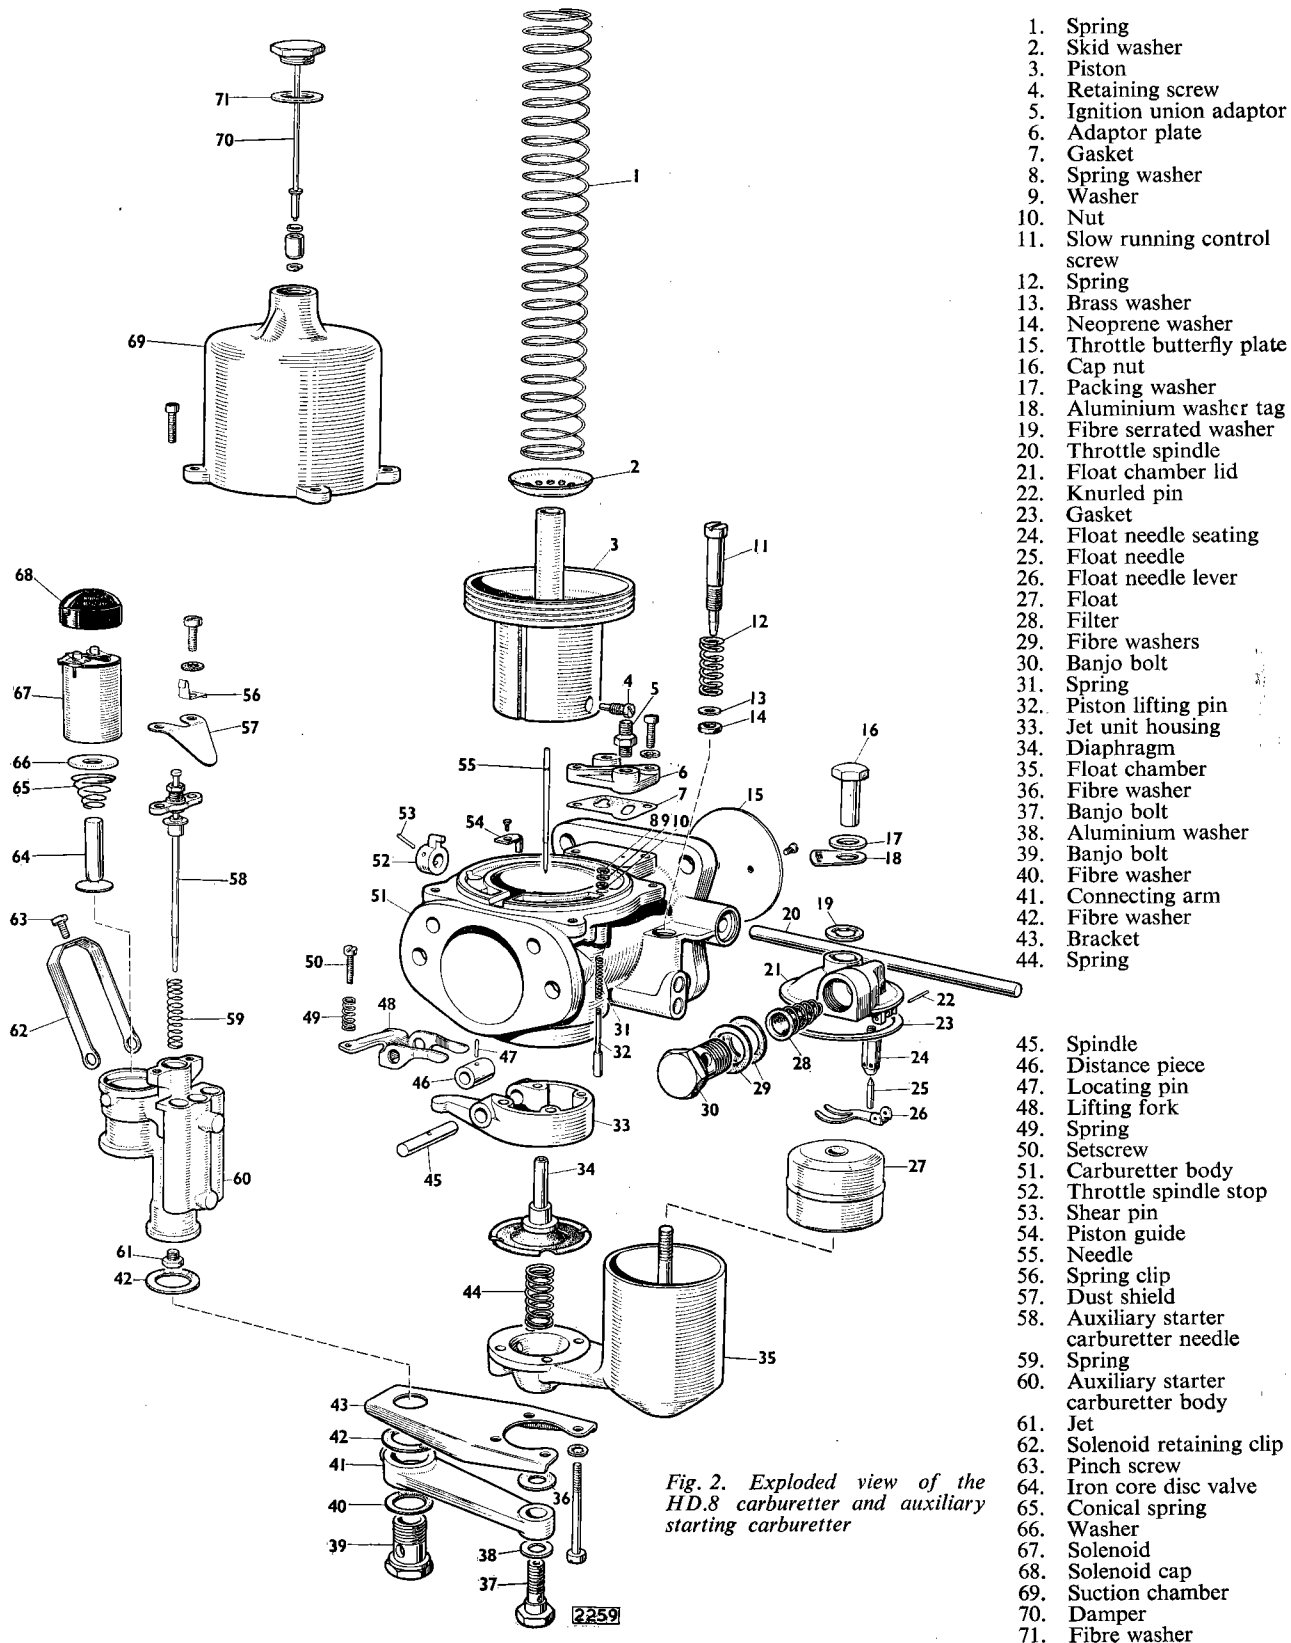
Exploded view of the HD.8 carburettor and auxiliary starting carburettor
